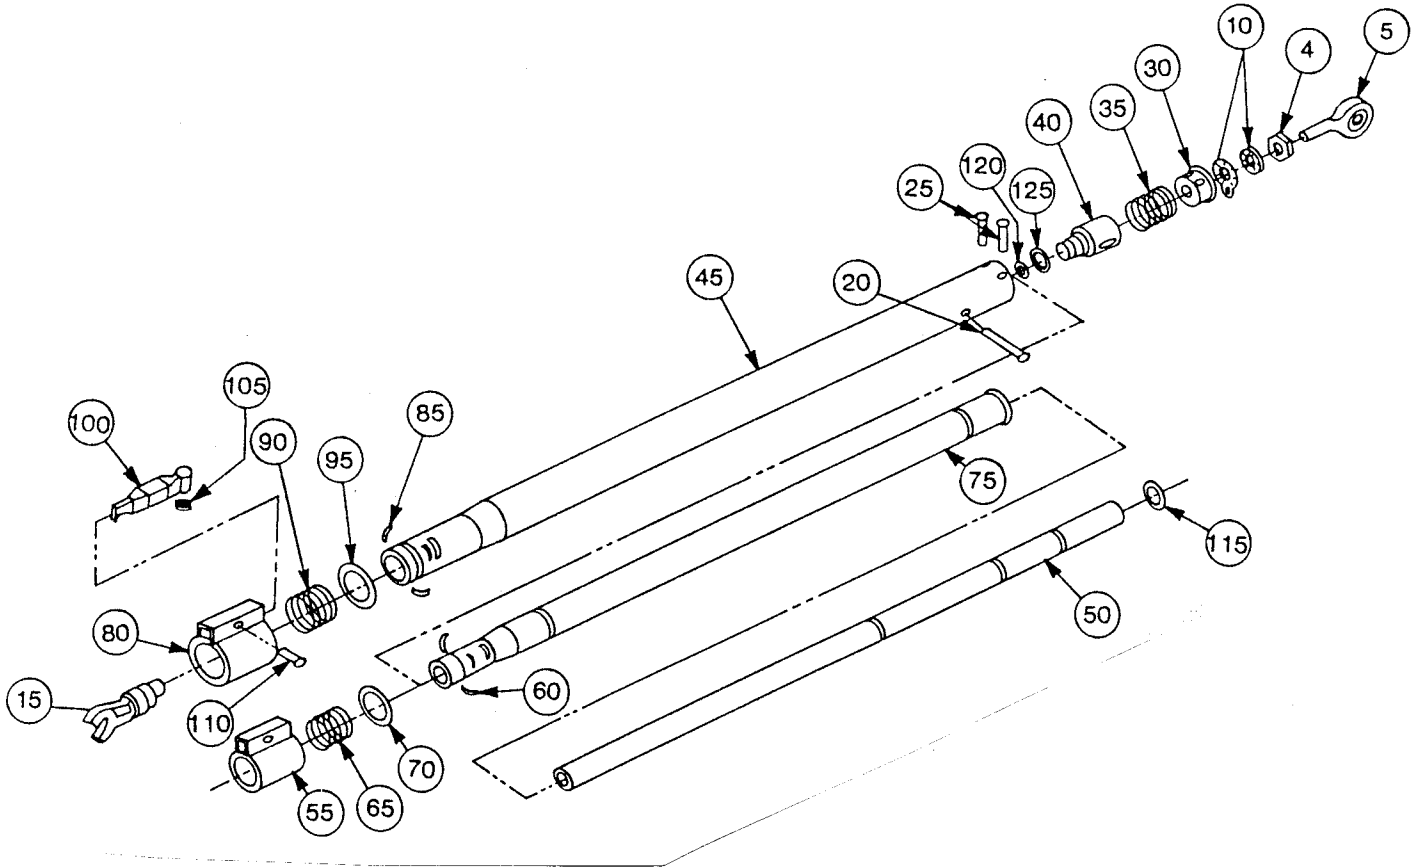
A2764-3 STRUT ASSEMBLY
